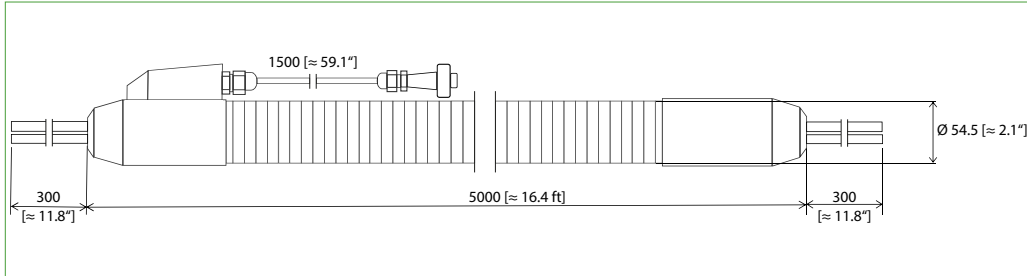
Dimensions for heated gas sample line PSS-STS-B
